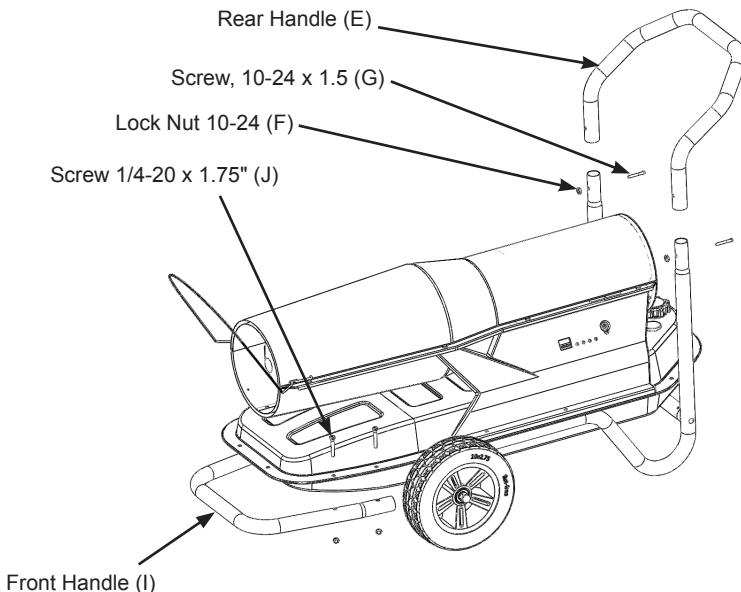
Handle Assembly, 160, 175 and 220 Models
